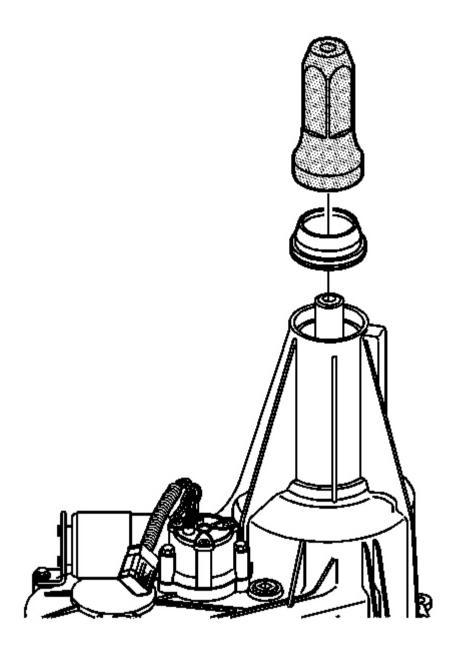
Installing Rear Output Shaft Seal By Using J 45756 Courtesy of GENERAL MOTORS CORP.
